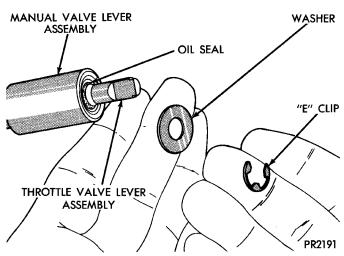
Throttle Shaft E-Clip, Washer, and Seal
